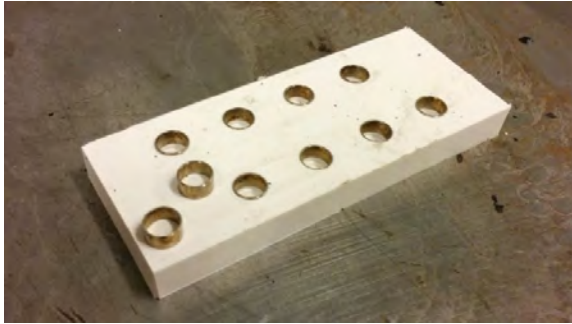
Silicon rubber mould to produce 8 half specimen, with stainless steel rings in place and two loose rings on top for reference
